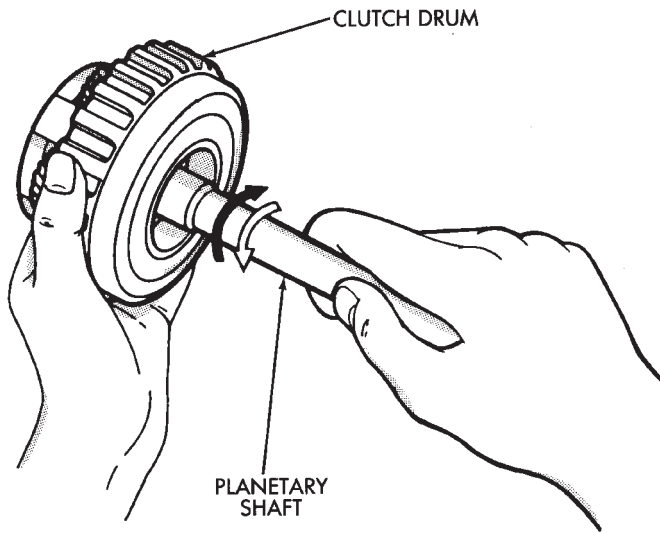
Overdrive Planetary Gear And Clutch Components
